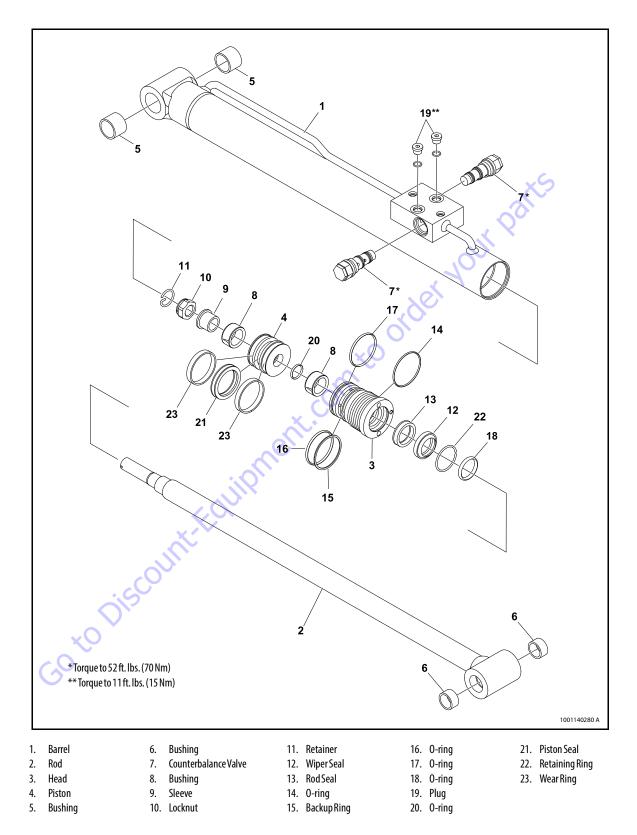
Jib Lift Cylinder (USA Built Machine)
